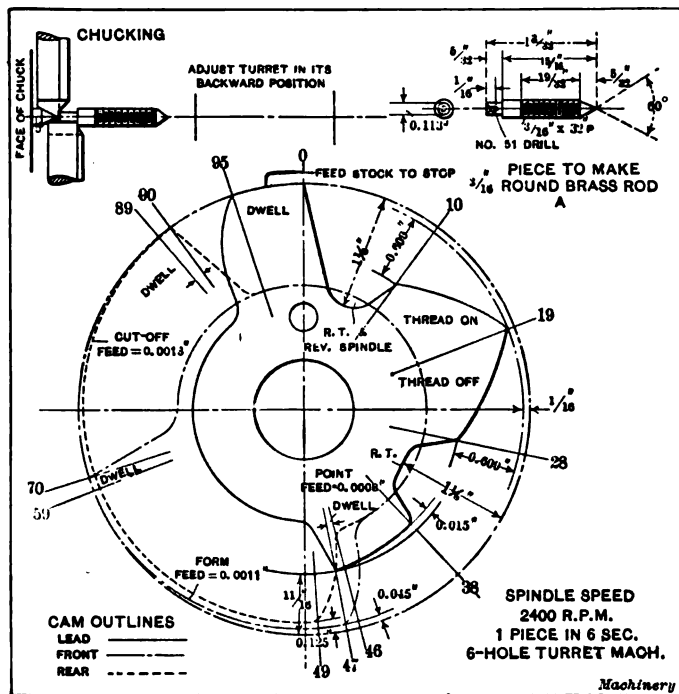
Lead and Cross-slide Cams for Making a Cone-pointed Screw having a Hole drilled in the Rear End
